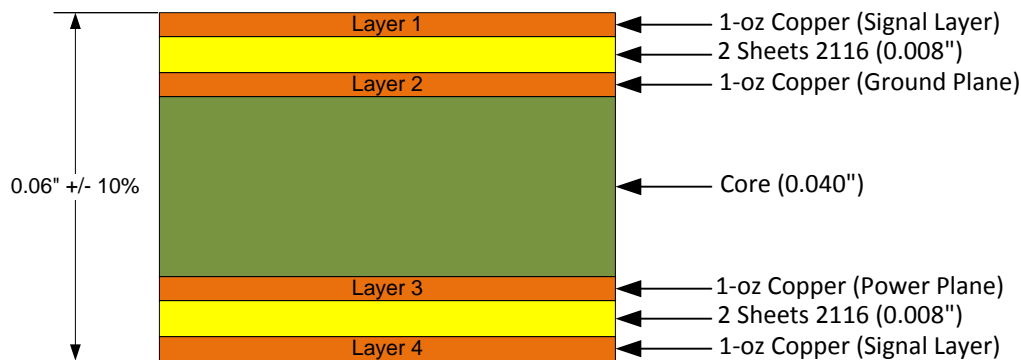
Typical 4-Layer PCB Stackup With Routing Assignments
